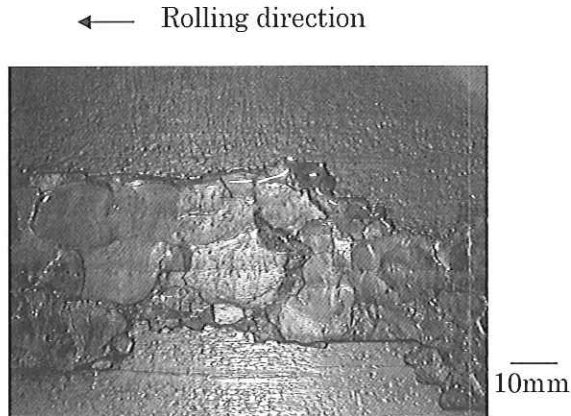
Surface small spalling of roll used in hot rolling mill roll
